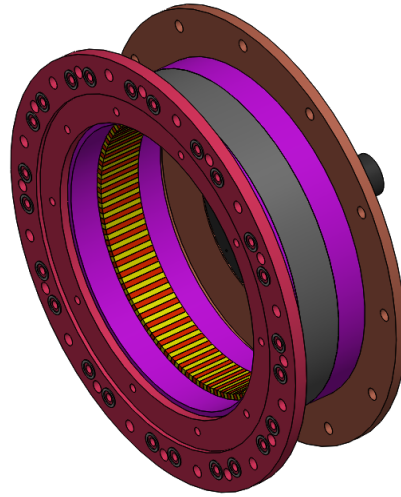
Outer rotor assembly process, Second stage of the MSMG design.
